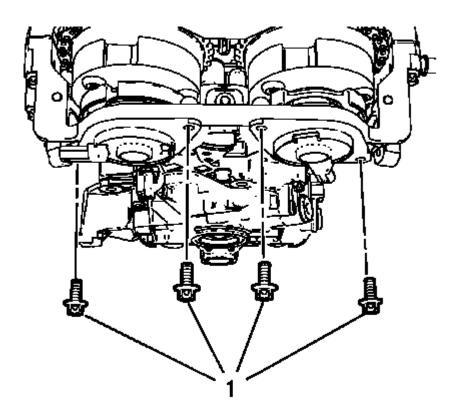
Camshaft Position Actuator Solenoid Valves And Seal Rings Courtesy of GENERAL MOTORS COMPANY
